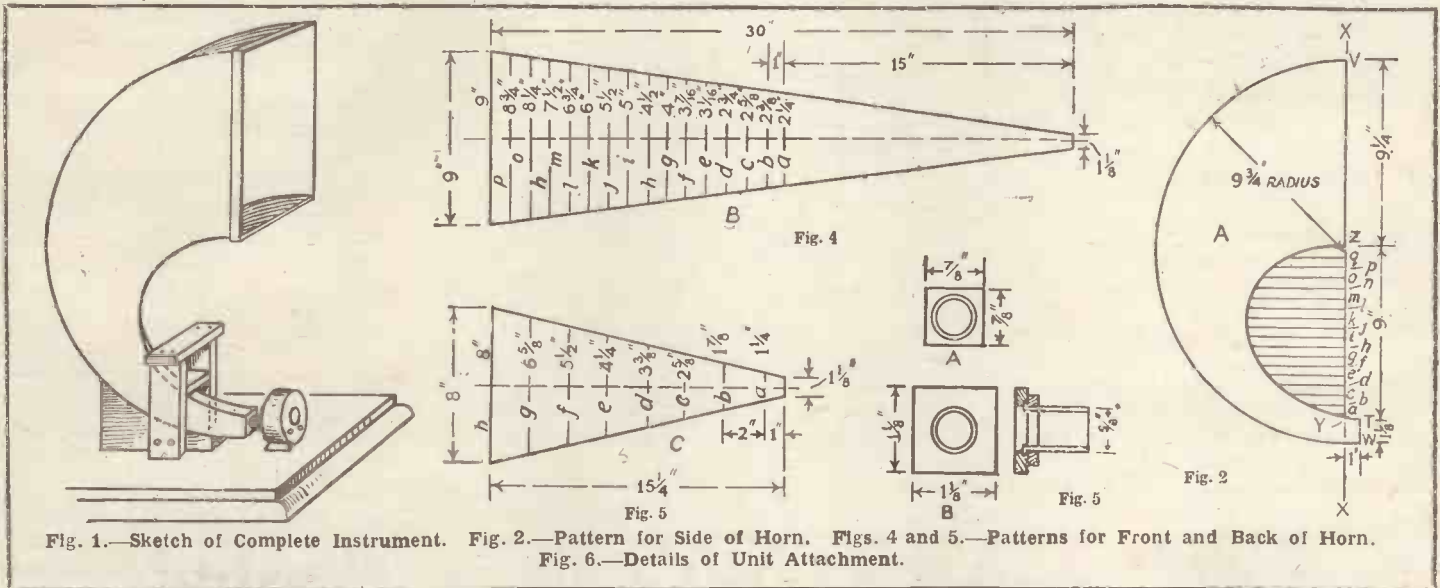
Sketch of Complete Instrument. Fig. 2.—Pattern for Side of Horn. Figs. 4 and 5.—Patterns for Front and Back of Horn. Fig. 6.—Details of Unit Attachment.
